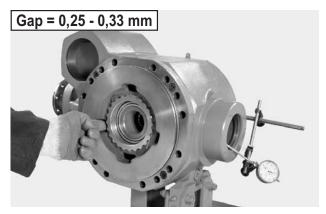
As you hold the pinion in position, move the ring gear manually in both directions to check clearance between pinion and ring gear. Standard clearance: 0,25 - 0,33 mm
